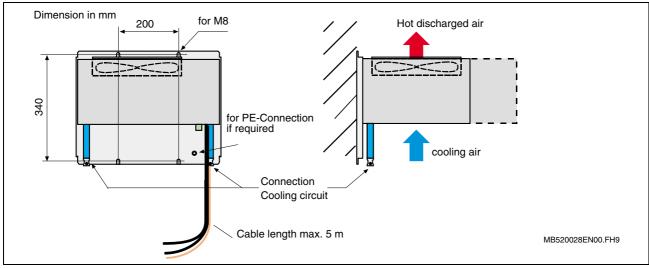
Dimension sheet for wall mounting, size class G
